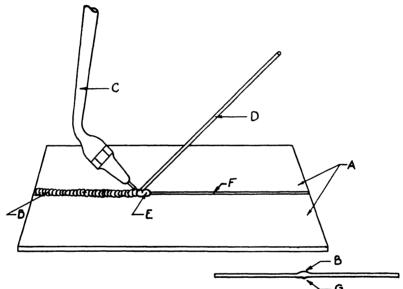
Flat Welding: A. Parent metal, B. Bead, C. Torch, D. Filler rod, E. Puddle, F. Gap in the Seam, G. Penetration
